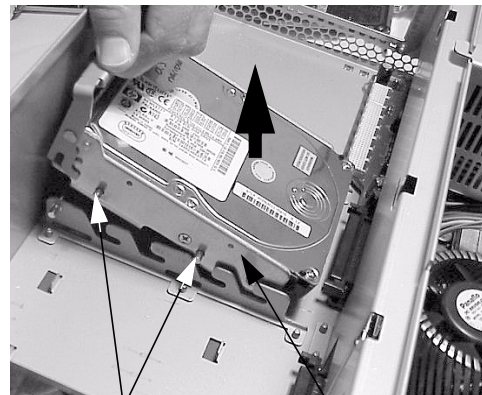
Removing the Hard Disk Drive and Its Mounting Bracket
